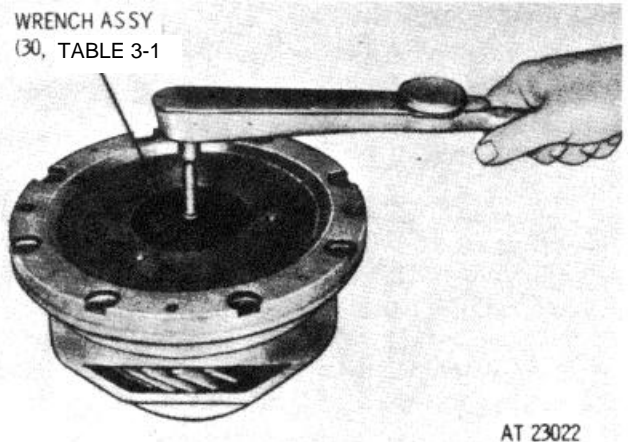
Checking preload torque of bevel drive gear bearings.
